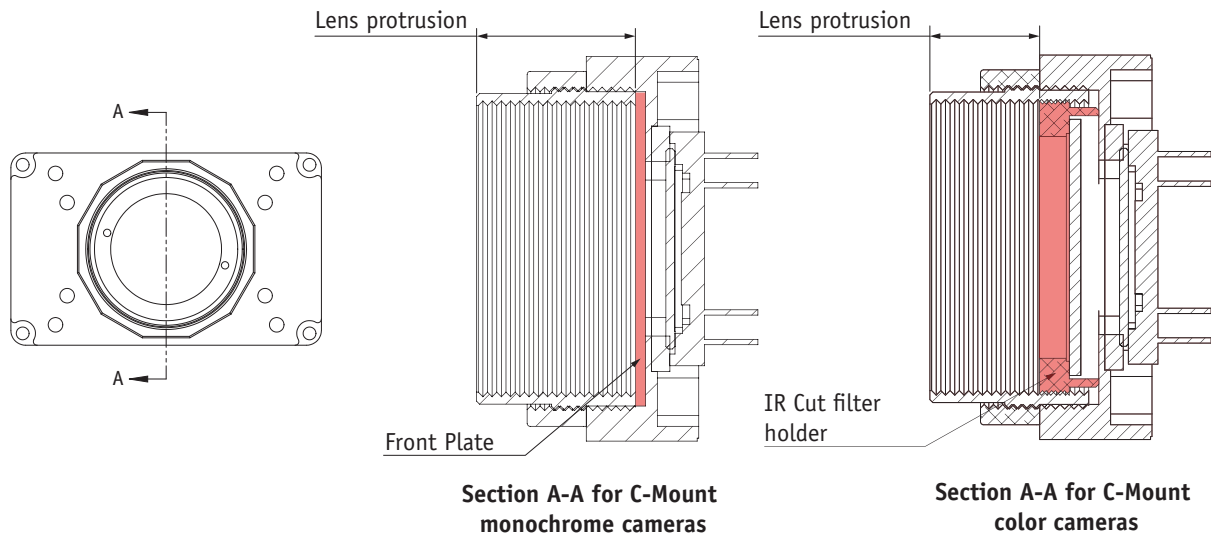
Cross section of typical Prosilica GT front assembly with C-Mount
